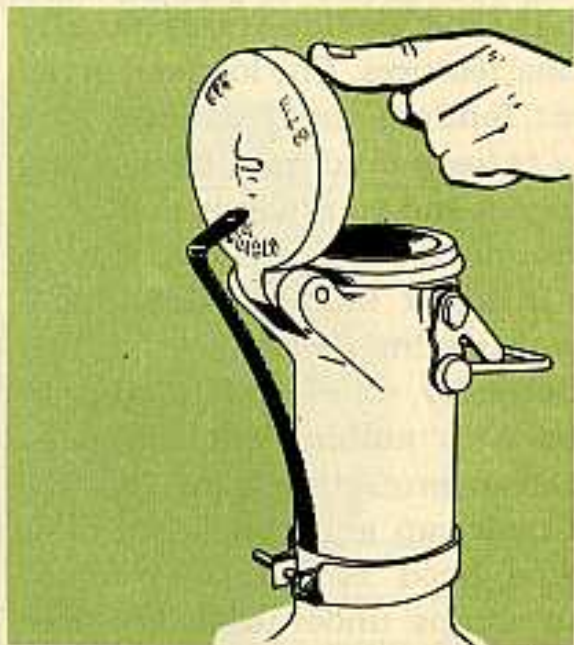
Clamp blade to fill pipe with a 2-1/2" hose clamp so it's about 5/8" above filler cap when cap's in closed position.
